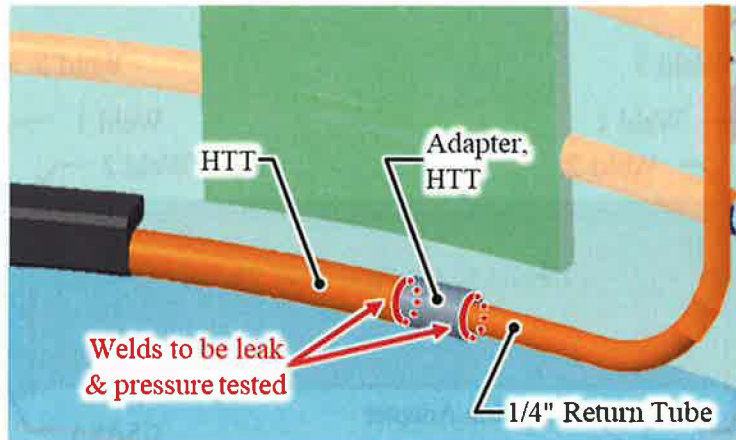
Welds to be tested during the installation of the HTT Return Tube
